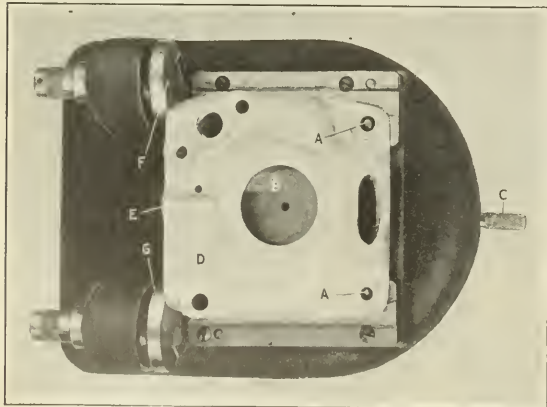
Special Type of Box Gaging Fixture used for inspecting Relation of Bore to Milled Surfaces on an Electric Starter Generator Frame
